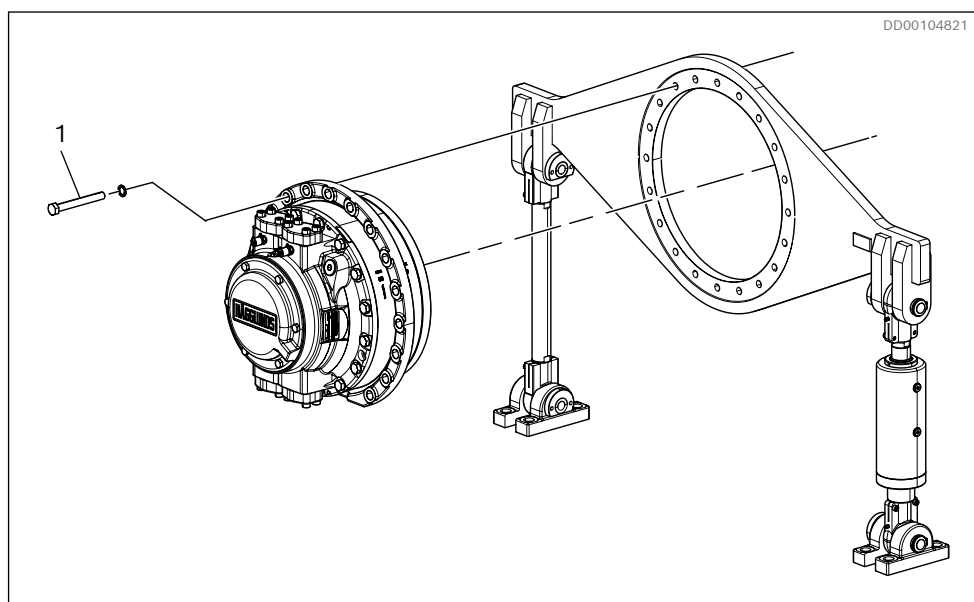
Mounting double ended torque arm DTCA 0050 to DTCA 0210 for CA 50 to CA 210
